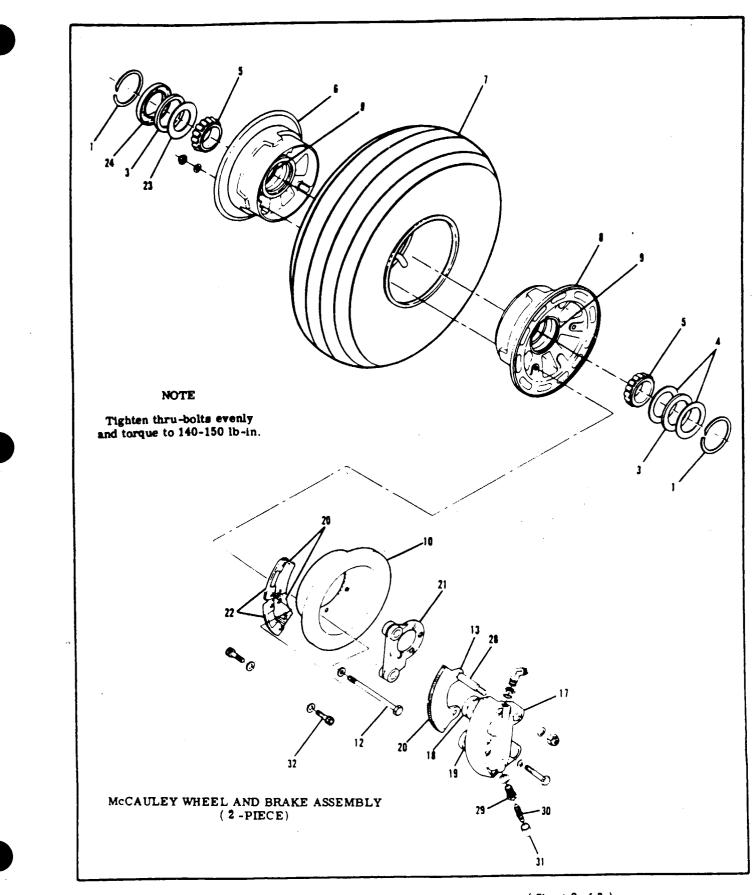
Main Landing Gear, Tire and Brake Assembly (Sheet 2 of 3 )
